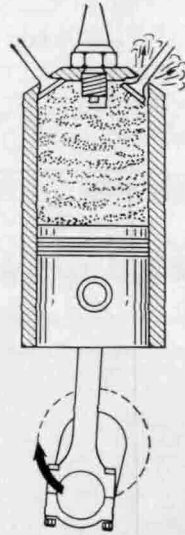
Exhaust stroke. The exhaust valve (to right) has opened, and the piston is moving upward, forcing the burned gases from the cylinder.
